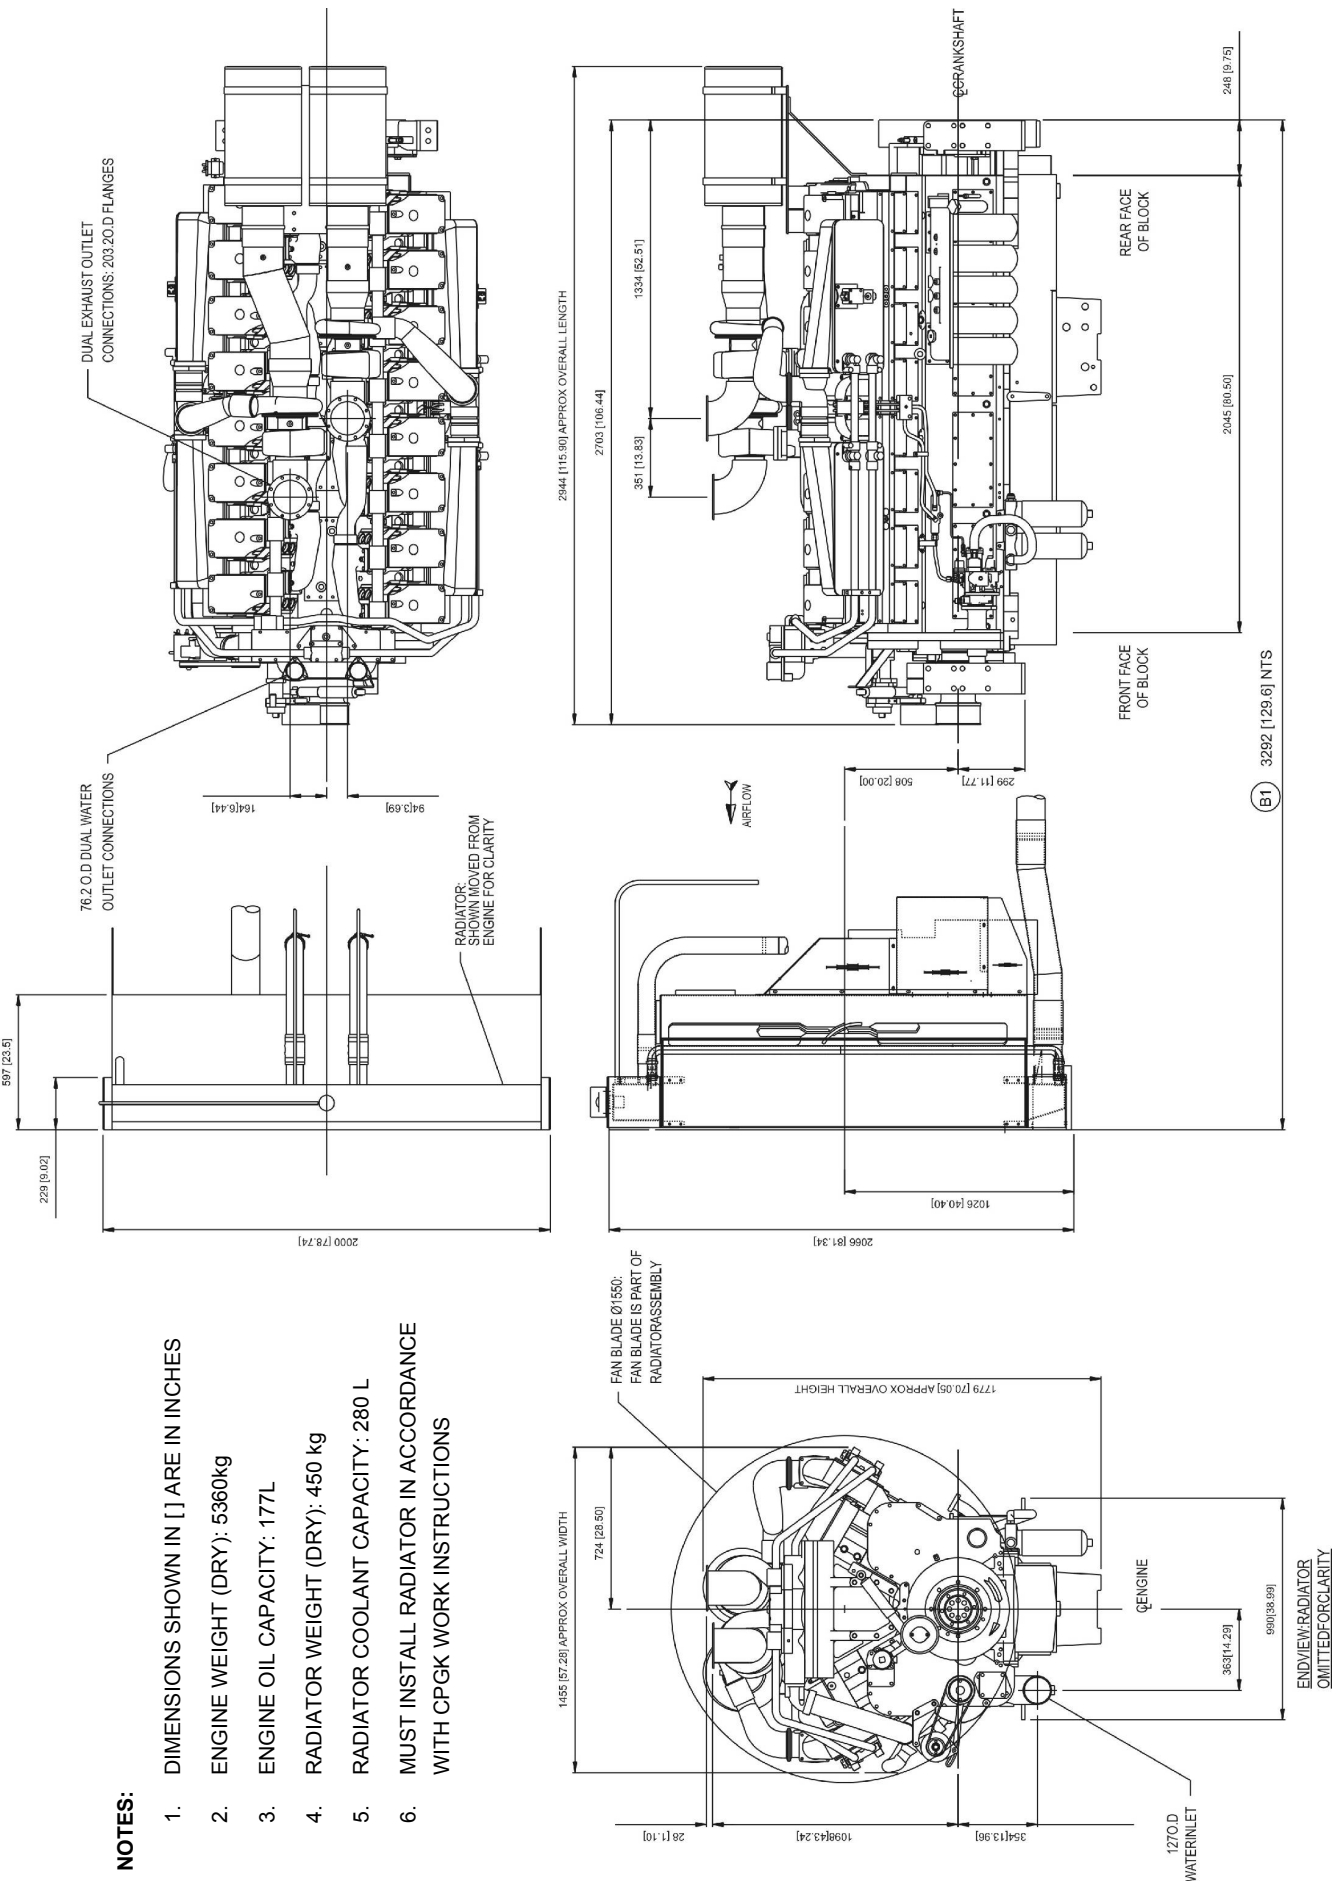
KTA50G3 ENGINE OUTLINE DRAWING
